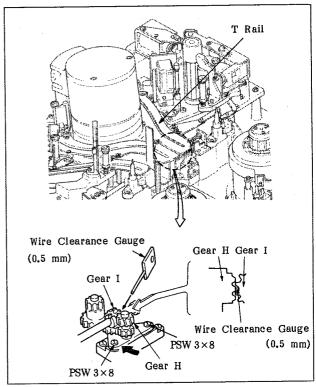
Adjustment of the Drive Shaft and Gear H
